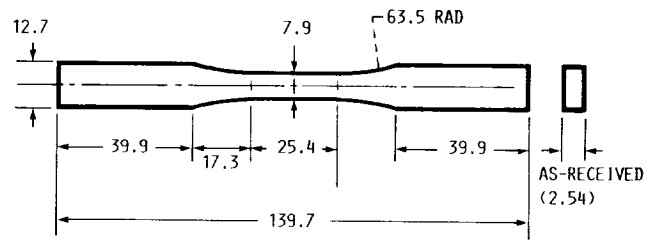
SCHEMATIC DIAGRAM OF A RECTANGULAR SPECIMEN. ALL DIMENSIONS ARE GIVEN IN MILLIMETERS UNLESS MARKED OTHERWISE.
